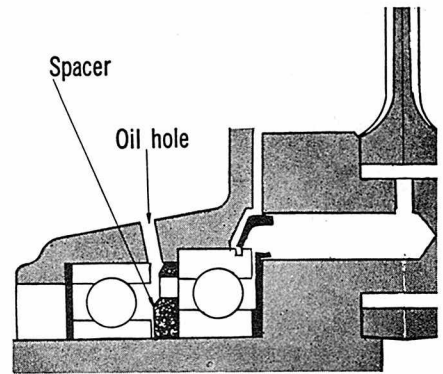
When assembling the crankshaft left main bearings, make sure that spacer between bearings is installed with notches toward end as shown.
